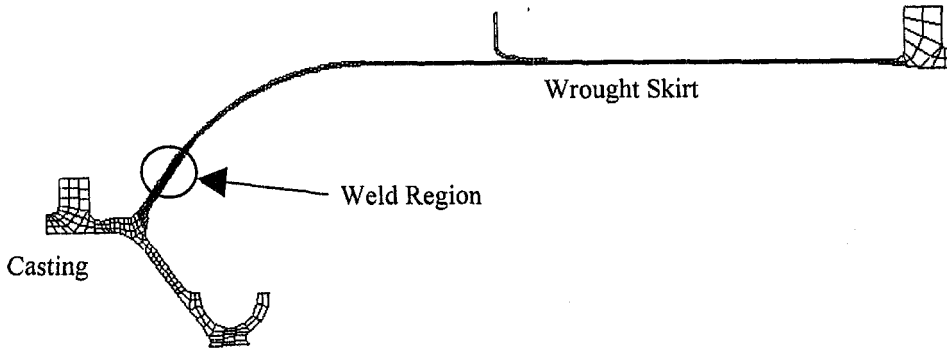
Axisymmetric Mesh for Casting to Skirt Weld
